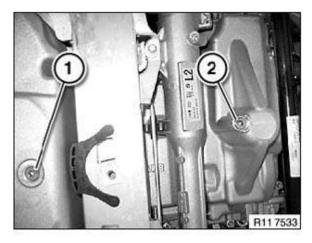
Identifying Oil Drain Plug Courtesy of BMW OF NORTH AMERICA, INC.
